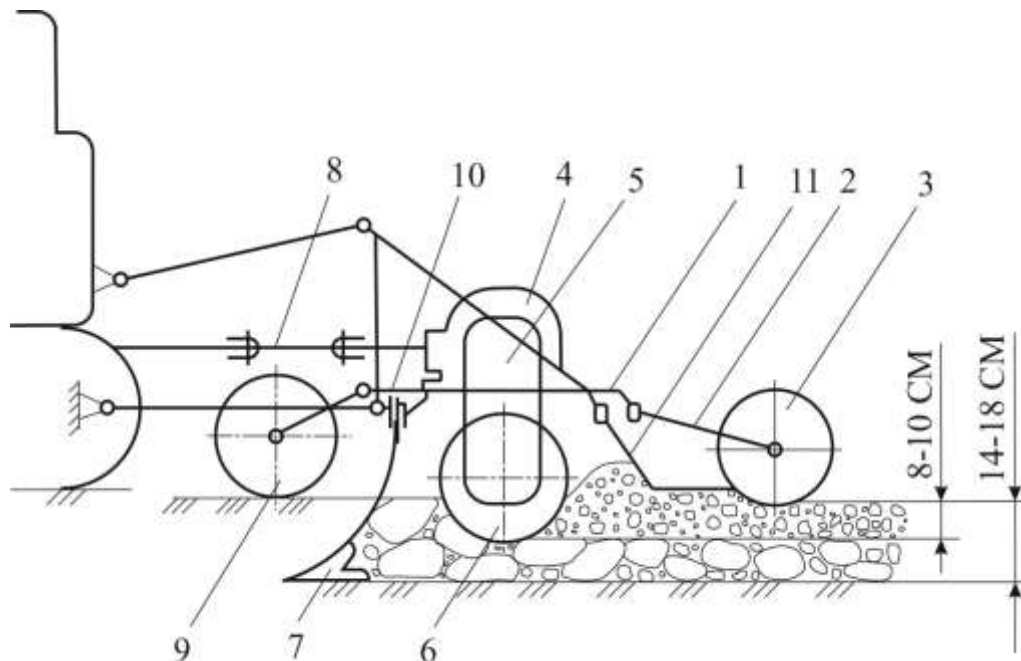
General view of the improved chisel-cultivator: 1 – frame of the device; 2 – drawbar; 3 – reel; 4 – central reducer; 5 – side reducer; 6 – rotor; 7 – softening working body; 8 – cardan shaft; 9 – base wheels; 10 – support wheel mounting bracket; 11 – straightening apron.
